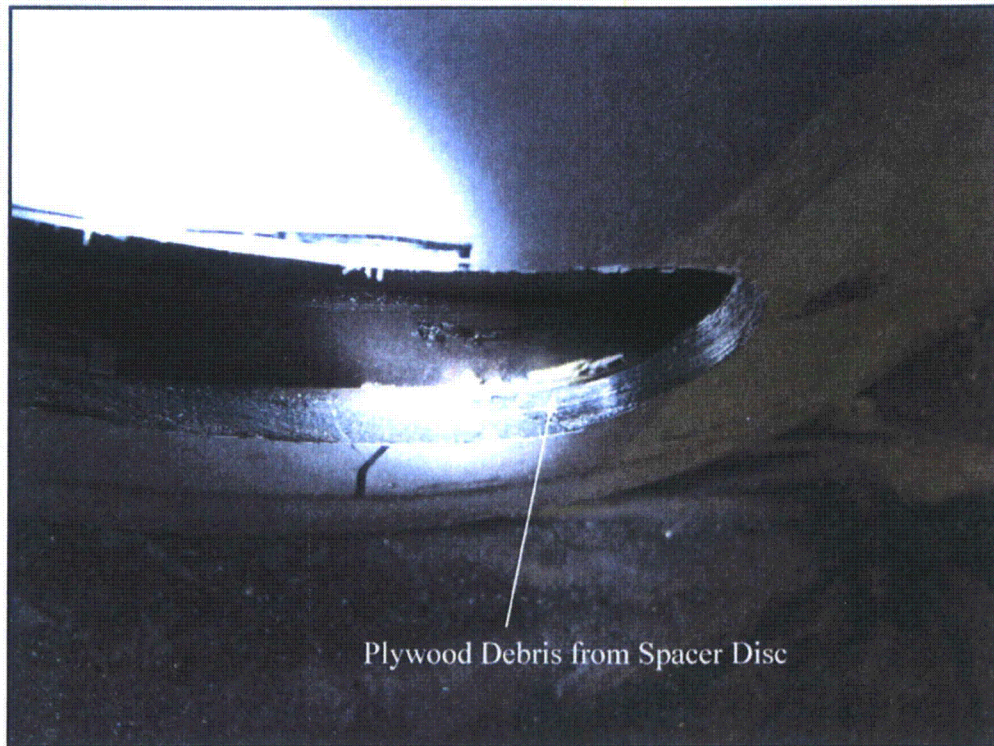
NS30 #1 Cut-out from Lower Canister Shell to Inspect Engagement of Bottom End Cap
